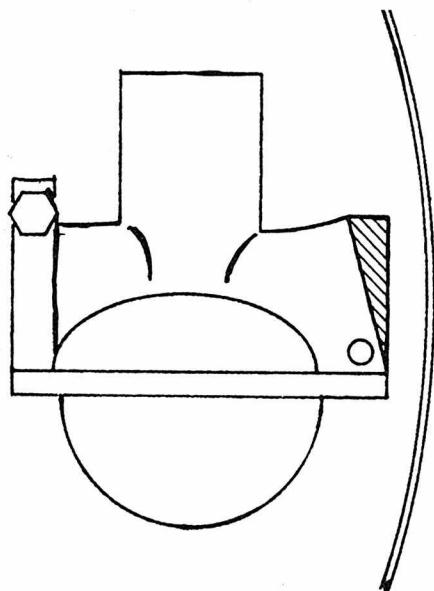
Carburetor intake may be trimmed as shown by shaded area to improve air flow.
